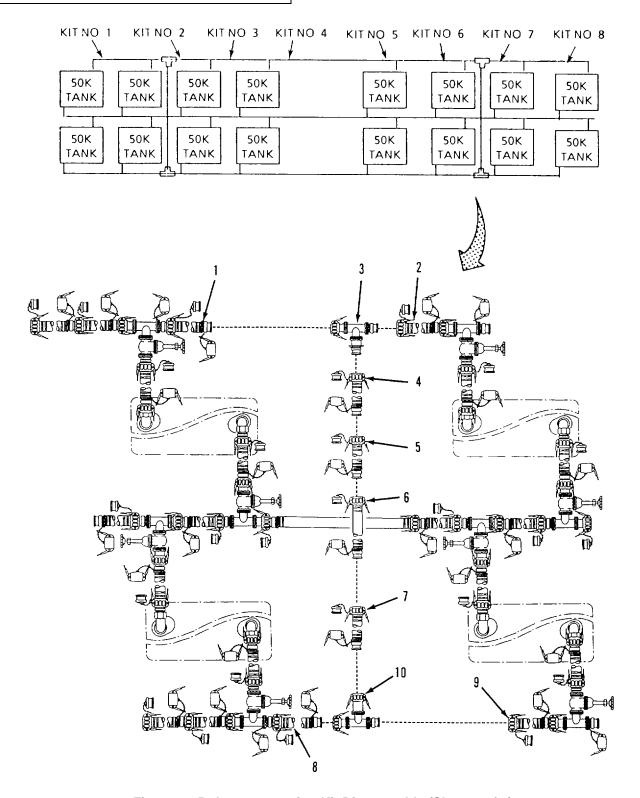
Interconnection Kit Disassembly (Sheet 2 of 2)
